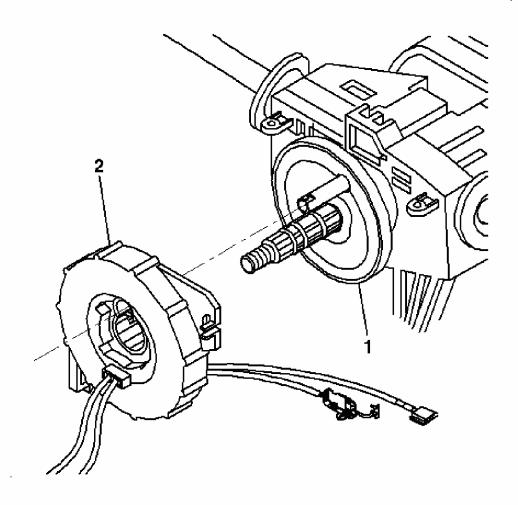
Installing Inflatable Restraint Steering Wheel Module Coil Courtesy of GENERAL MOTORS CORP.
